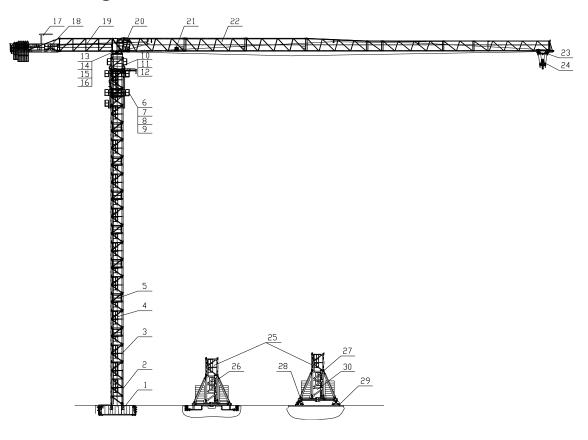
Parts indications of the WA7025-10E Tower Crane
